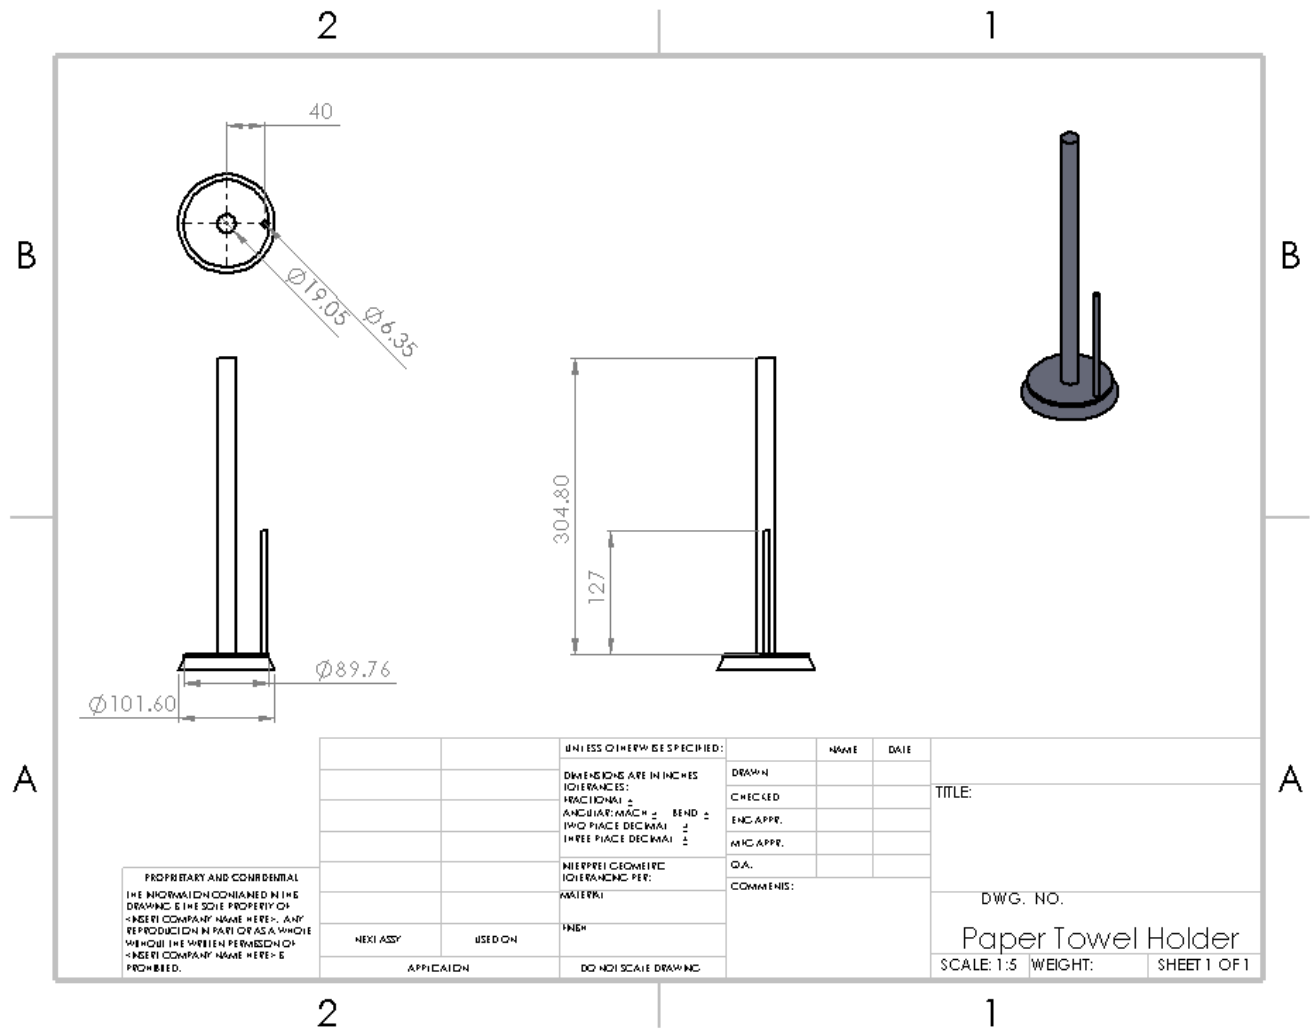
Part Size Problem. “Paper towel holder: the paper towel roll fits over the main the large rod, with the smaller rod used for removing individual towels.”
